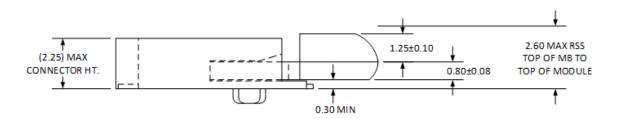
H2.3-S2 - Stack-up Top Mount Single-sided Module for 1.35 Maximum Component Height
